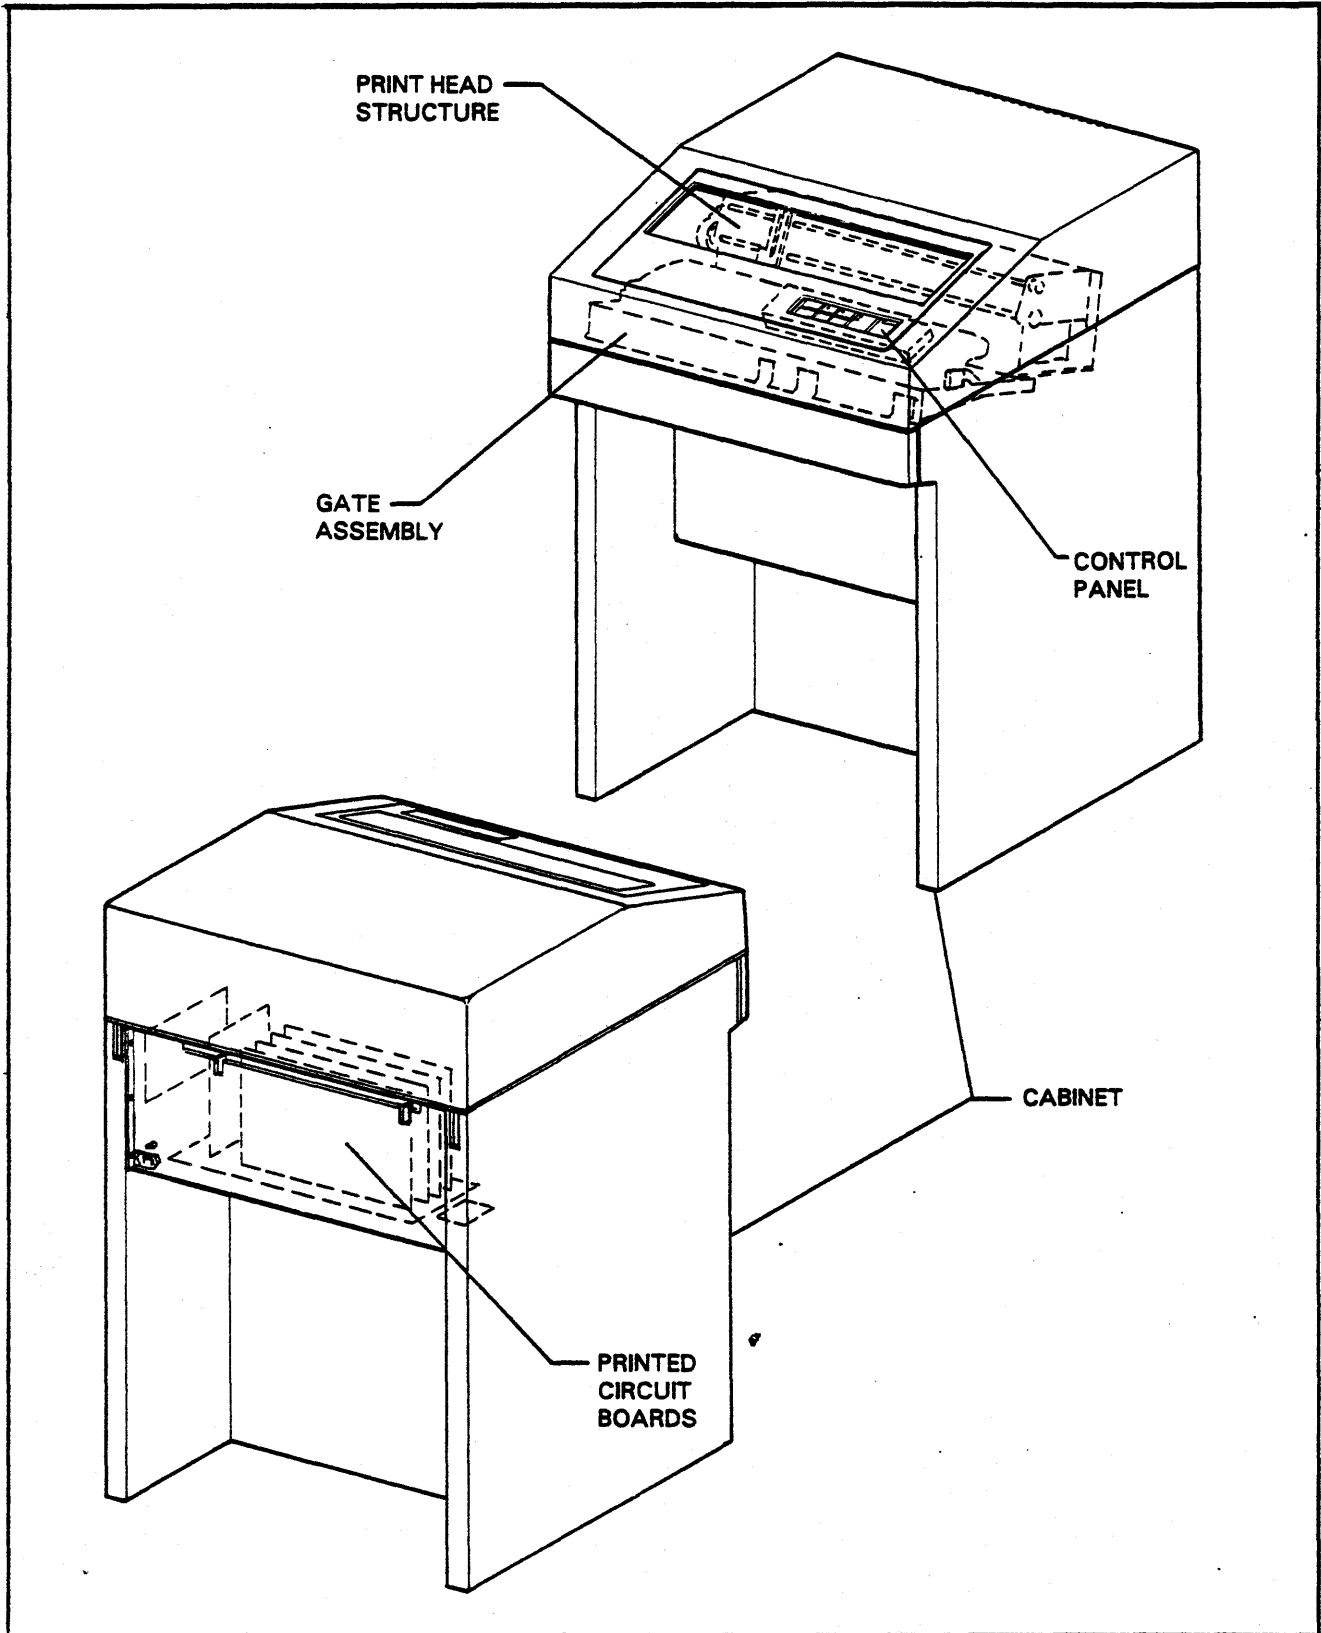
MAJOR PRINTER ASSEMBLIES
